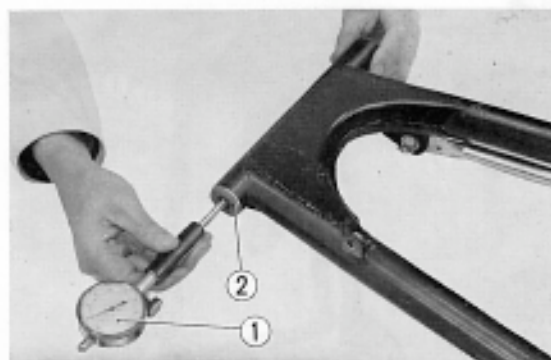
① Inside dial gauge ② Rear fork bushing
